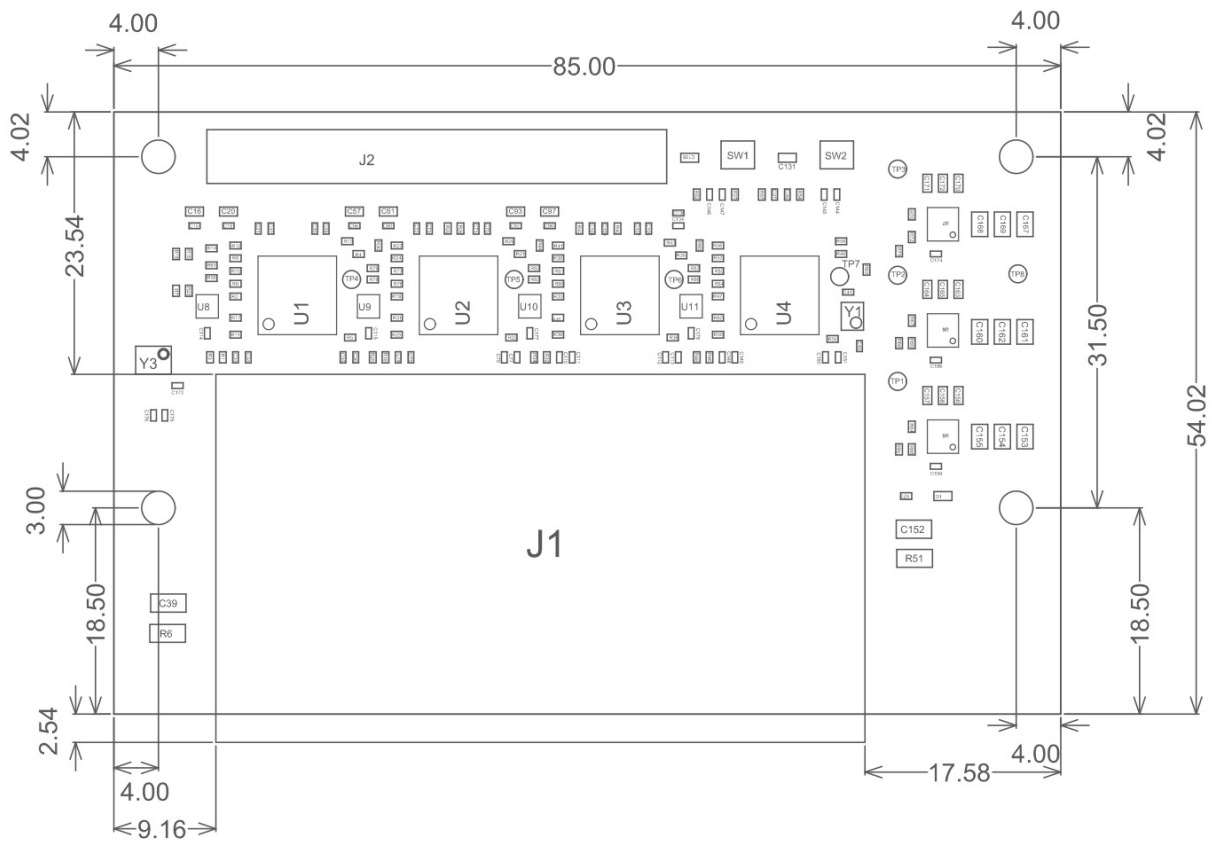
96B Quad Ethernet Mezzanine mechanical drawing
